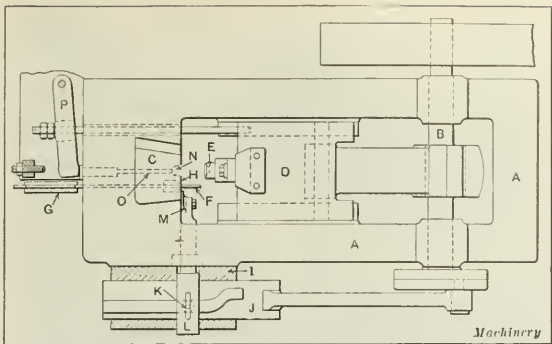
Plan View of Cold-header Mechanism, illustrating Method of Operation
